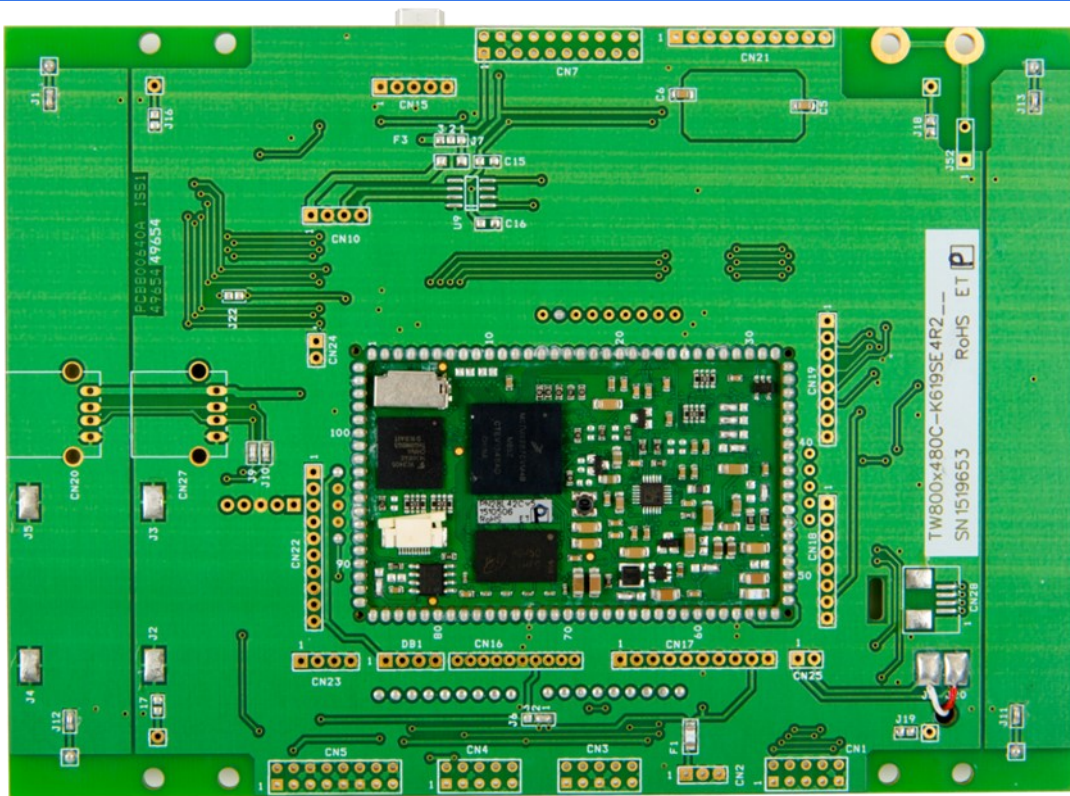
TW800x480C- K619SE4R2MU Rear View
